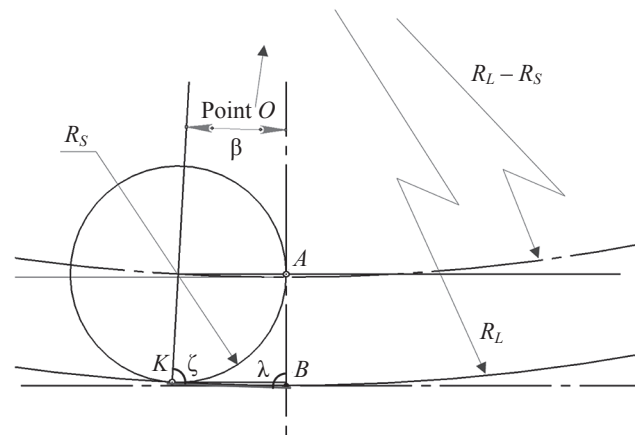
The rolling of the milling cutter onto the workpiece (point O is outside the drawing); K is a point of tangency between the milling cutter and the machined surface profile; ζ is the angle formed at point K between the milling cutter radius and the machined surface; λ is angle at point B between the machined surface profile and the horizontal reference (axis)
